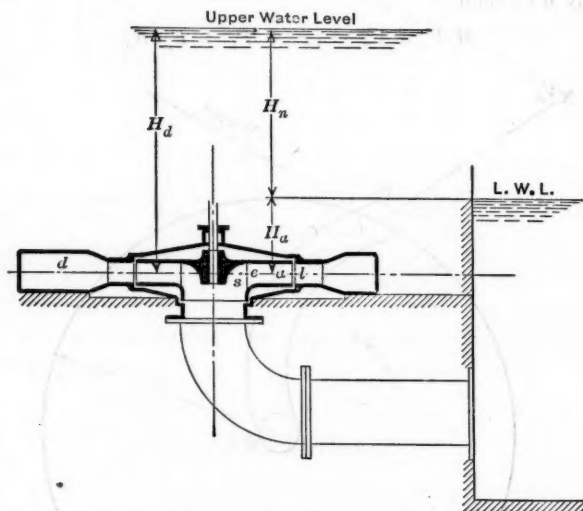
PLAN OF LOW-PRESSURE CENTRIFUGAL PUMP WITH VERTICAL SHAFT.
